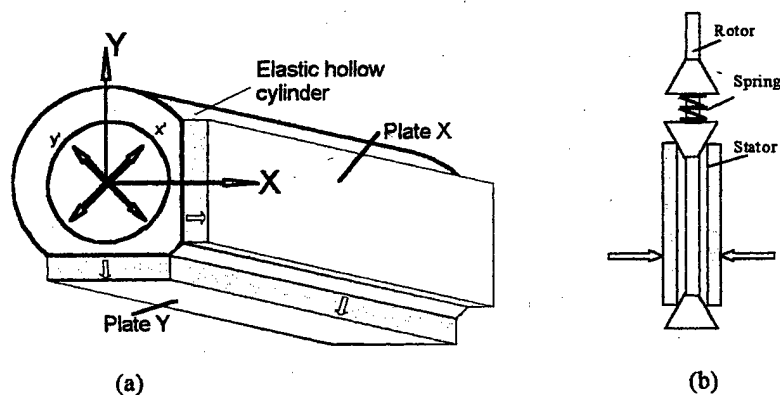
(a) Structure of a metal tube stator, and (b) assembly of the motor.
